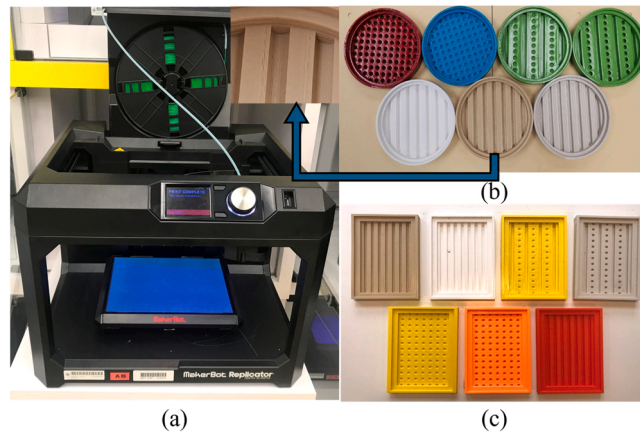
Appearances of 3D-printed basic molds: (a) a commercial 3D printer (Makerbot Replicator+); (b) basic molds for making noise test specimens; (c) basic molds for making skidding test specimens.
